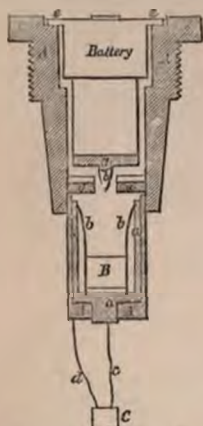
EXPLODER FOR PNEUMATIC DYNAMITE GUN.
